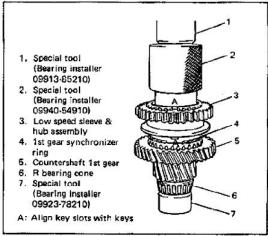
A-57 Press-fitting Low Speed Sleeve & Hub
